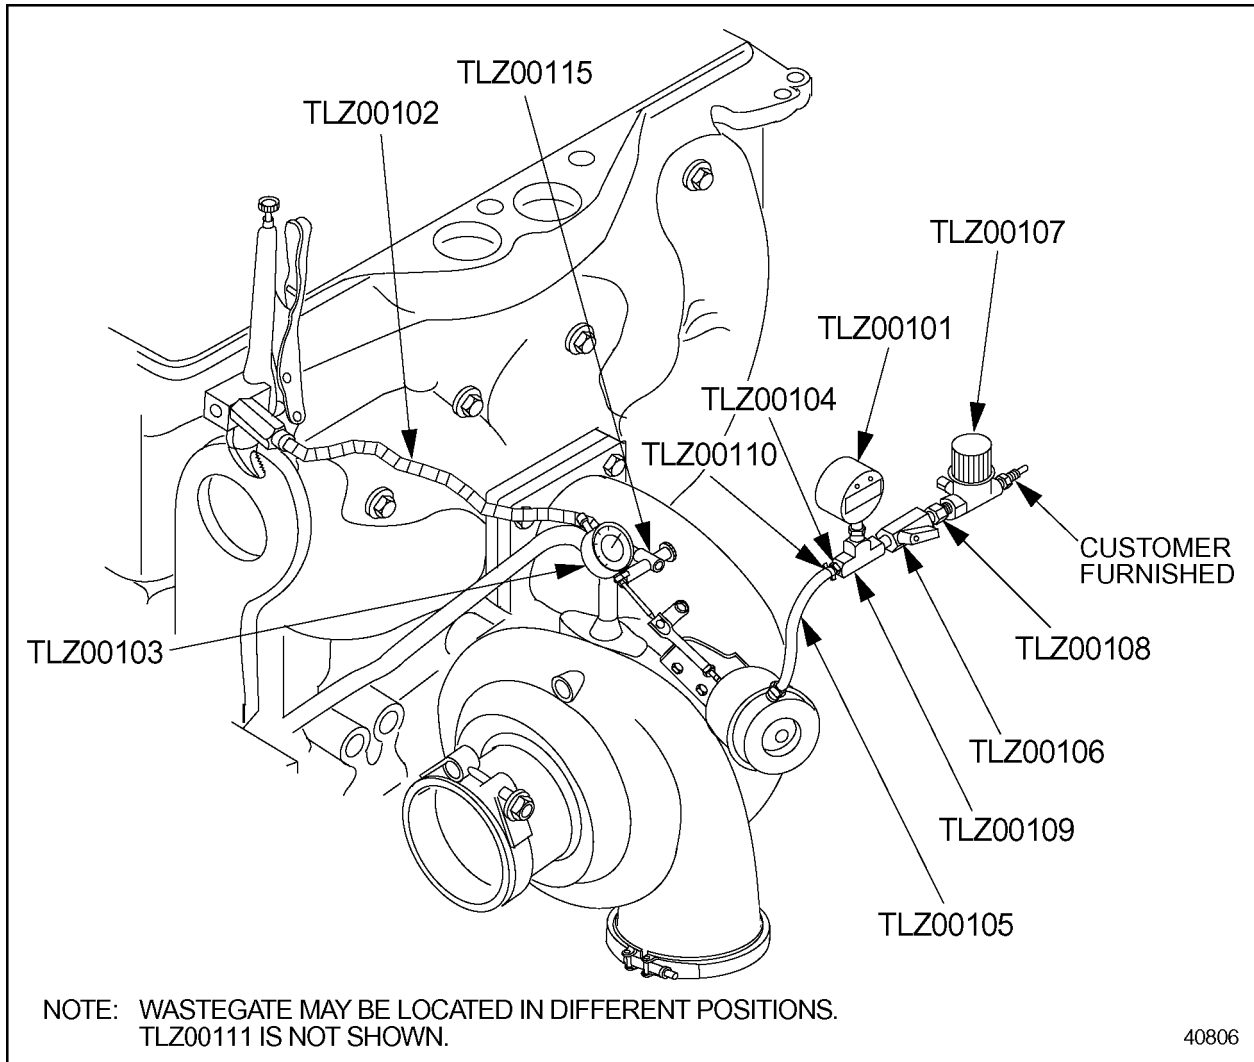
TLZ00100 Wastegate Calibration Tool Set-Up
